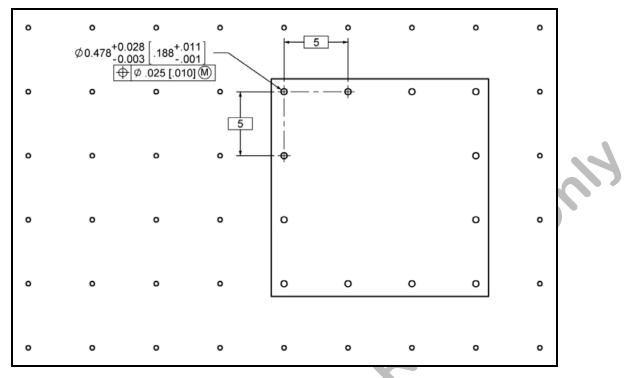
Typical SPA device mounting pattern. (Primary dimensional units are in centimeters, secondary units are in inches.)
